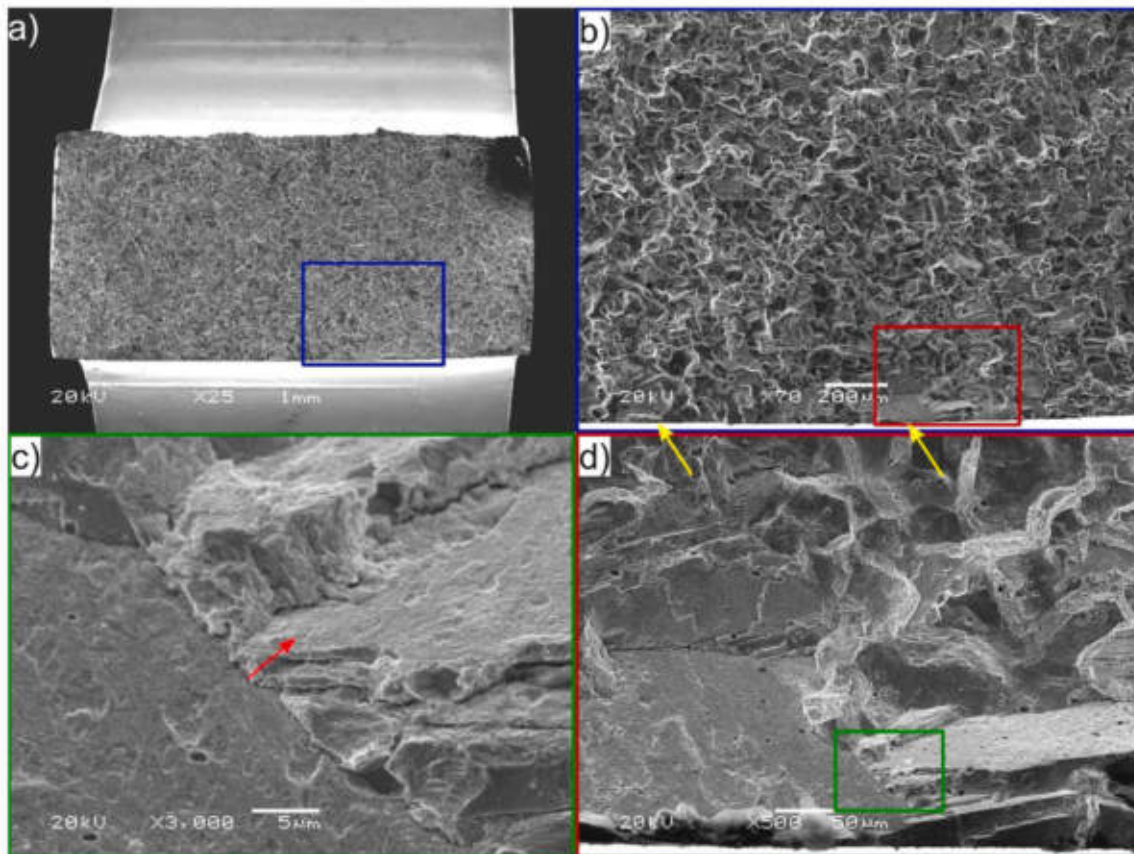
SEM picture of the fatigue fracture surface of Specimen 8.
